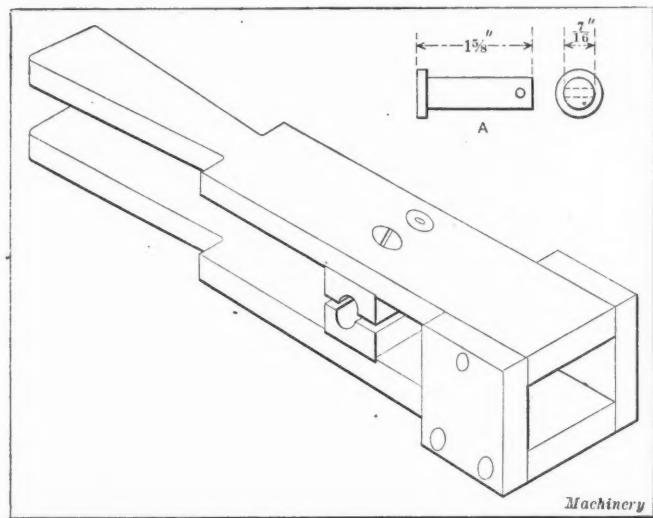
More Costly Form of Jig than that shown in Fig. 3 for drilling Cotter-pin Hole
